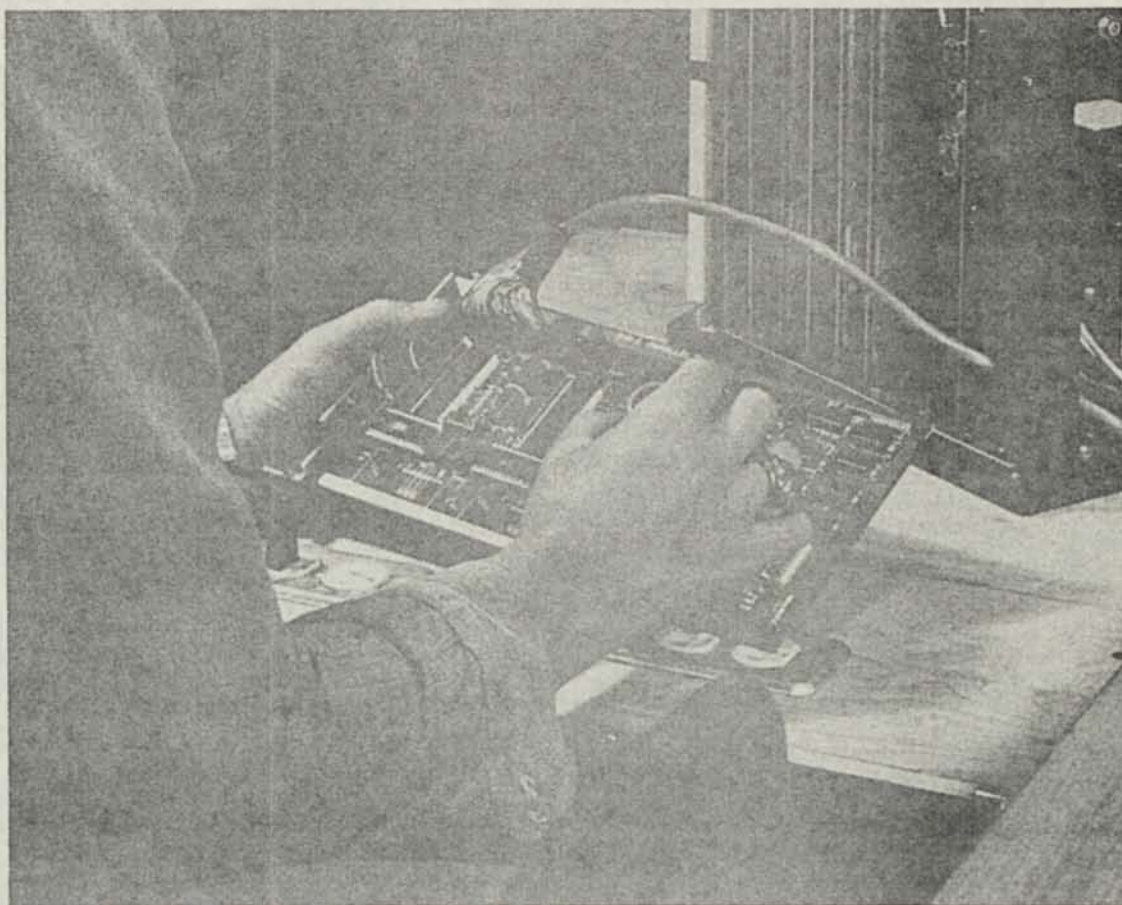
A student uses a magnifying lens to check for solder bridges on the Heathkit H8-2 parallel interface circuit board.
